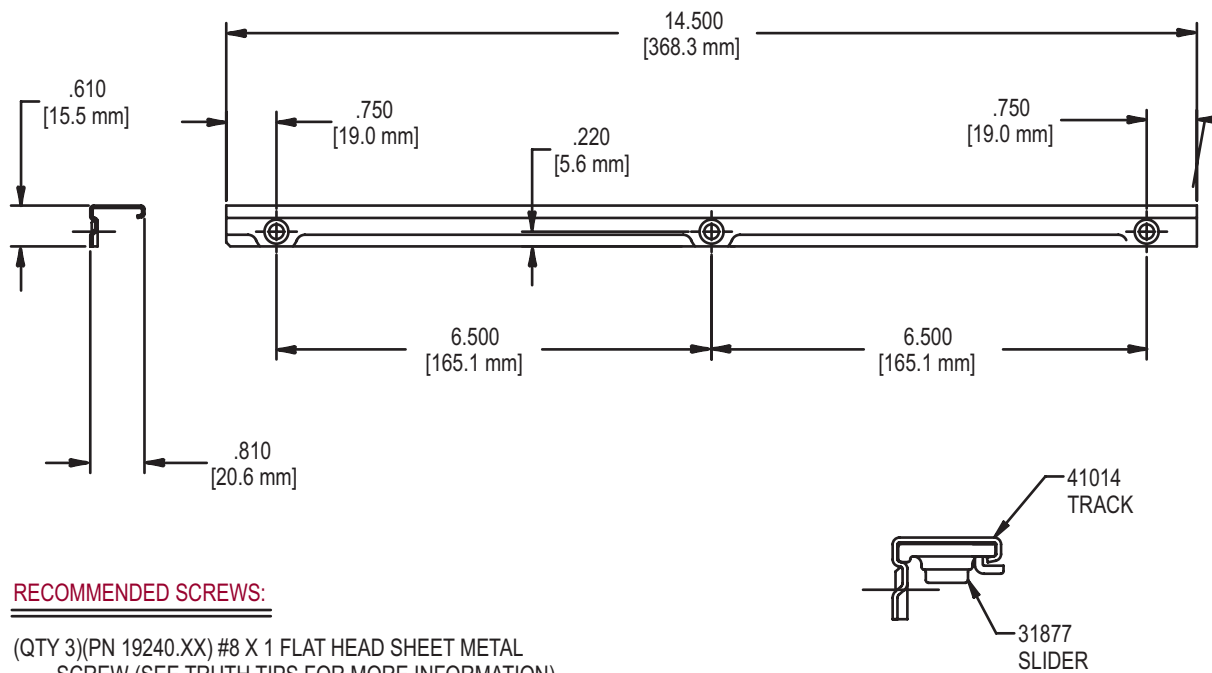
TRACK & SLIDER ASSEMBLY 11576.XX
